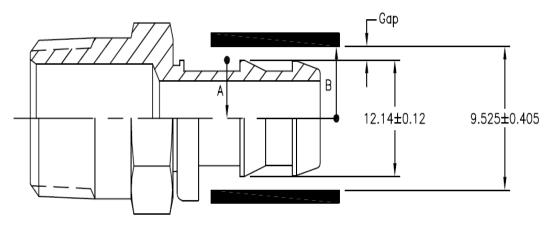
Tolerance stack-up Hose ID & Nipple OD
